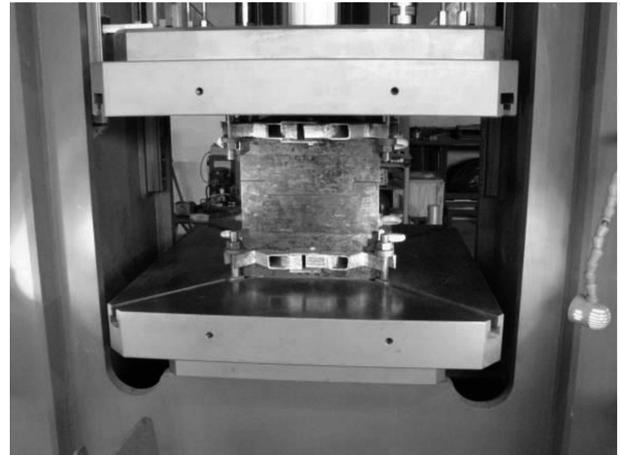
A set of tools for die forging on a 2.5MN press – assembled
